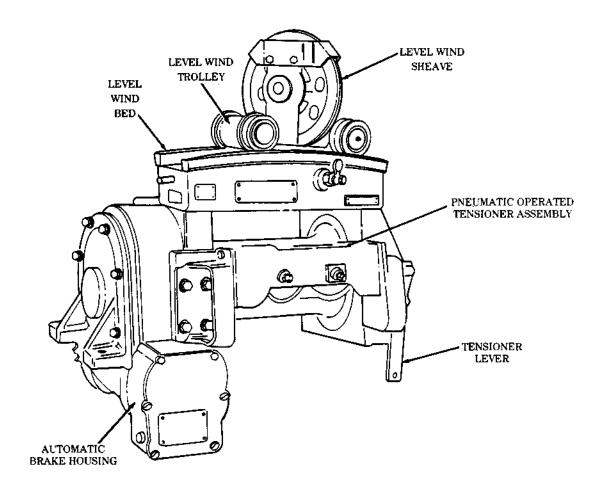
Rear Winch Assembly (M39, M809, and M939 Series Vehicles).
